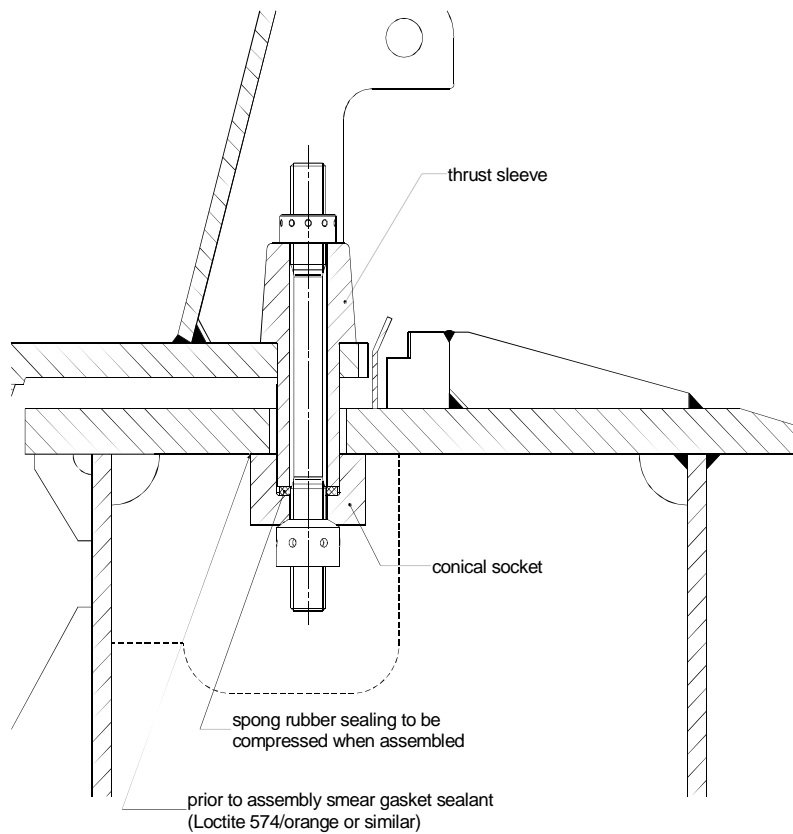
Arrangement of thrust sleeve with stud prior pouring the epoxy resin chocks
